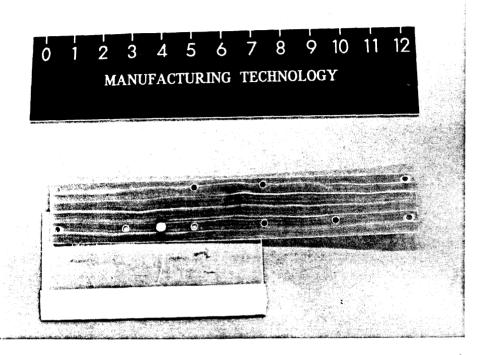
Countersunk rivet attachment of composite flange to aluminum.
